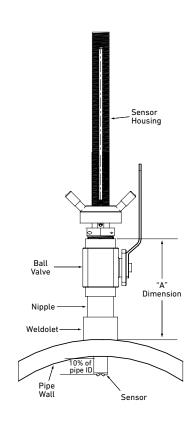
Hot-Tap installation with "A" dimension using a ball valve, short nipple and weldolet (threadolet)
